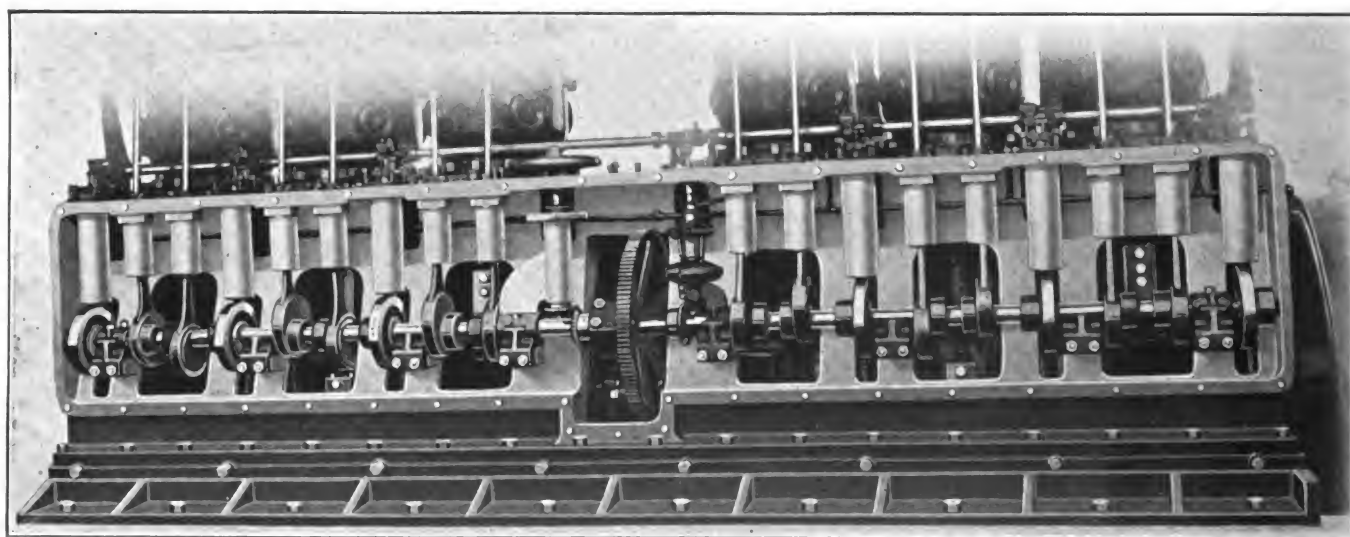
Operating side with cover removed to show camshaft, drive, bearings, and cam eccentrics
